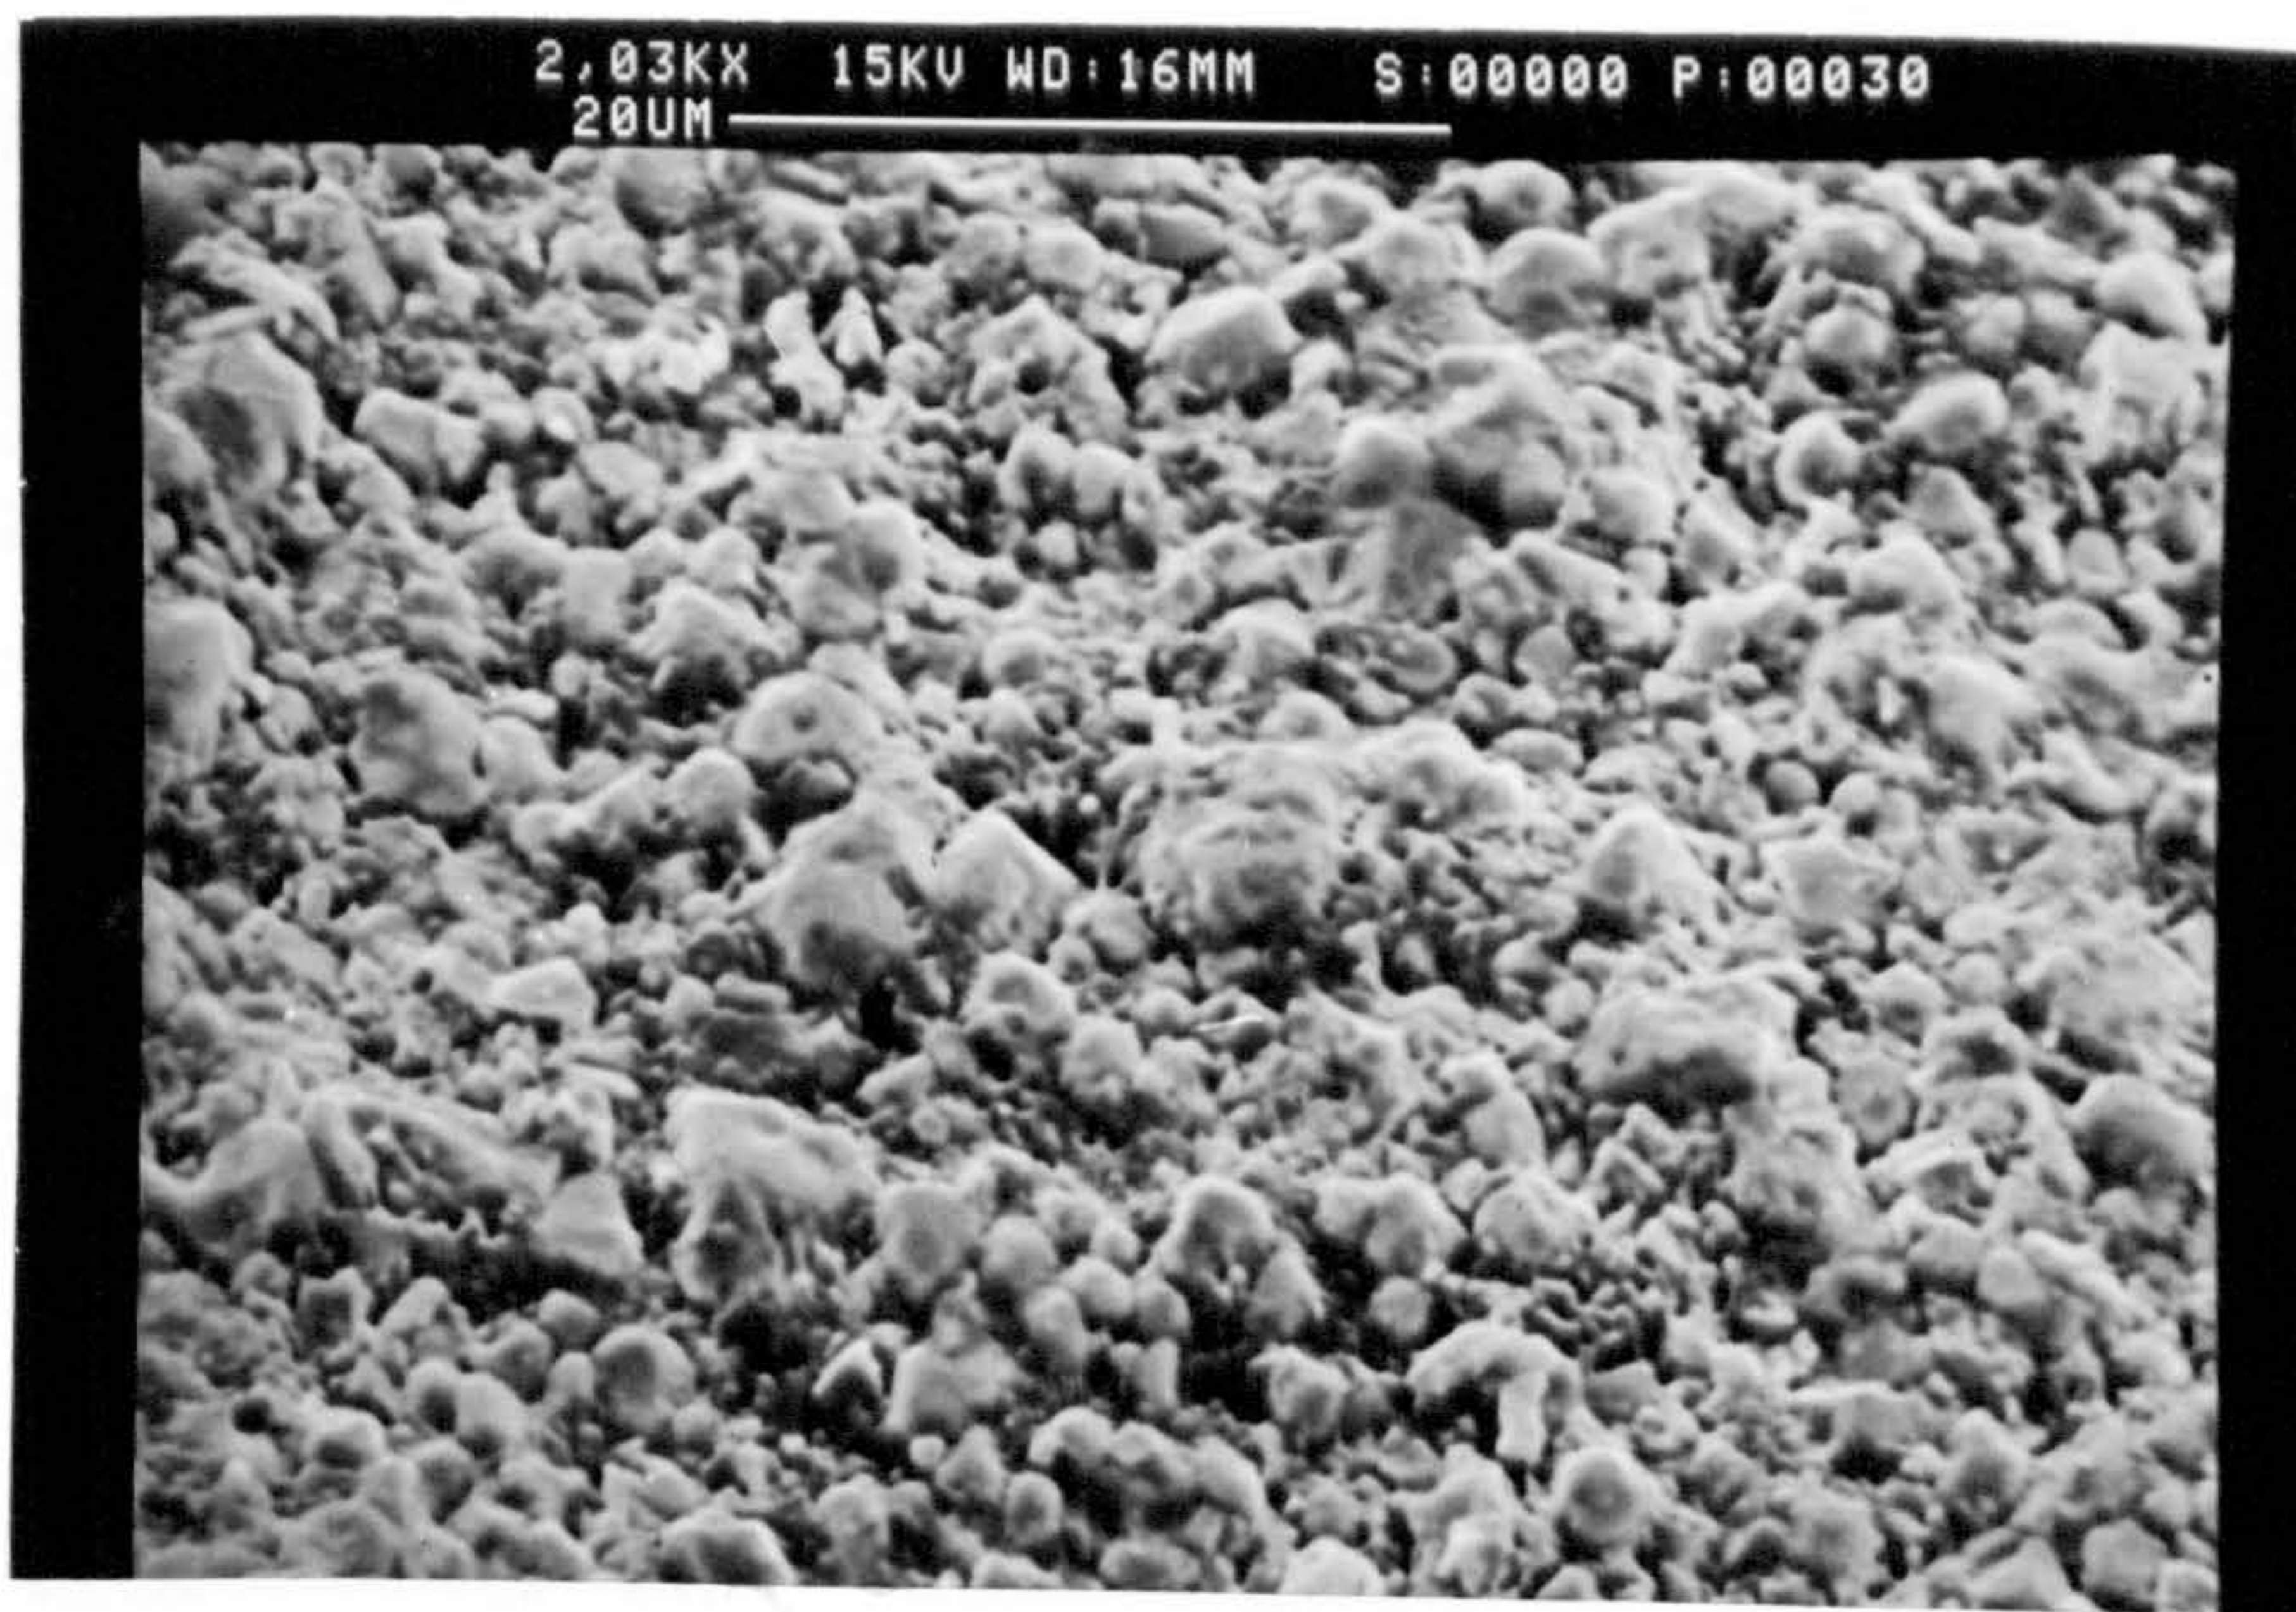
Highly magnified view of flank wear land near the cutting edge (P10 carbide tool)
